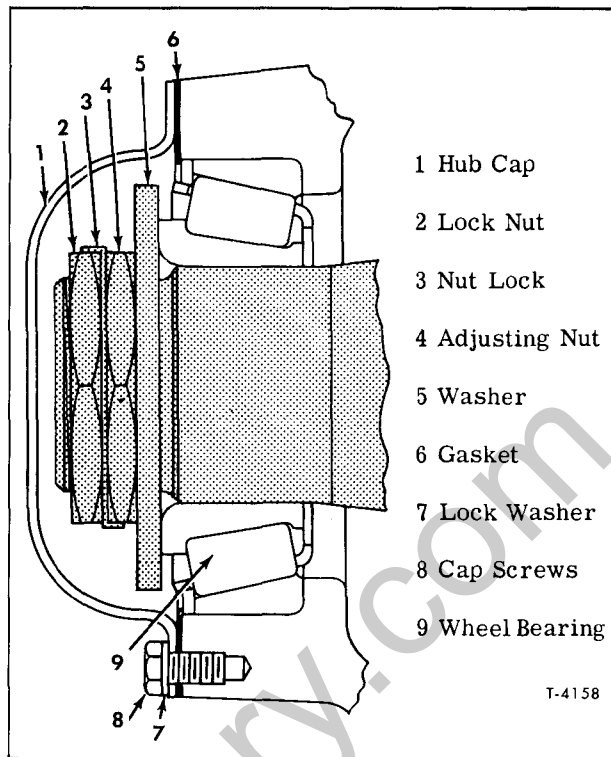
Front Wheel Bearing Adjustment Components (FE970 Axle)
